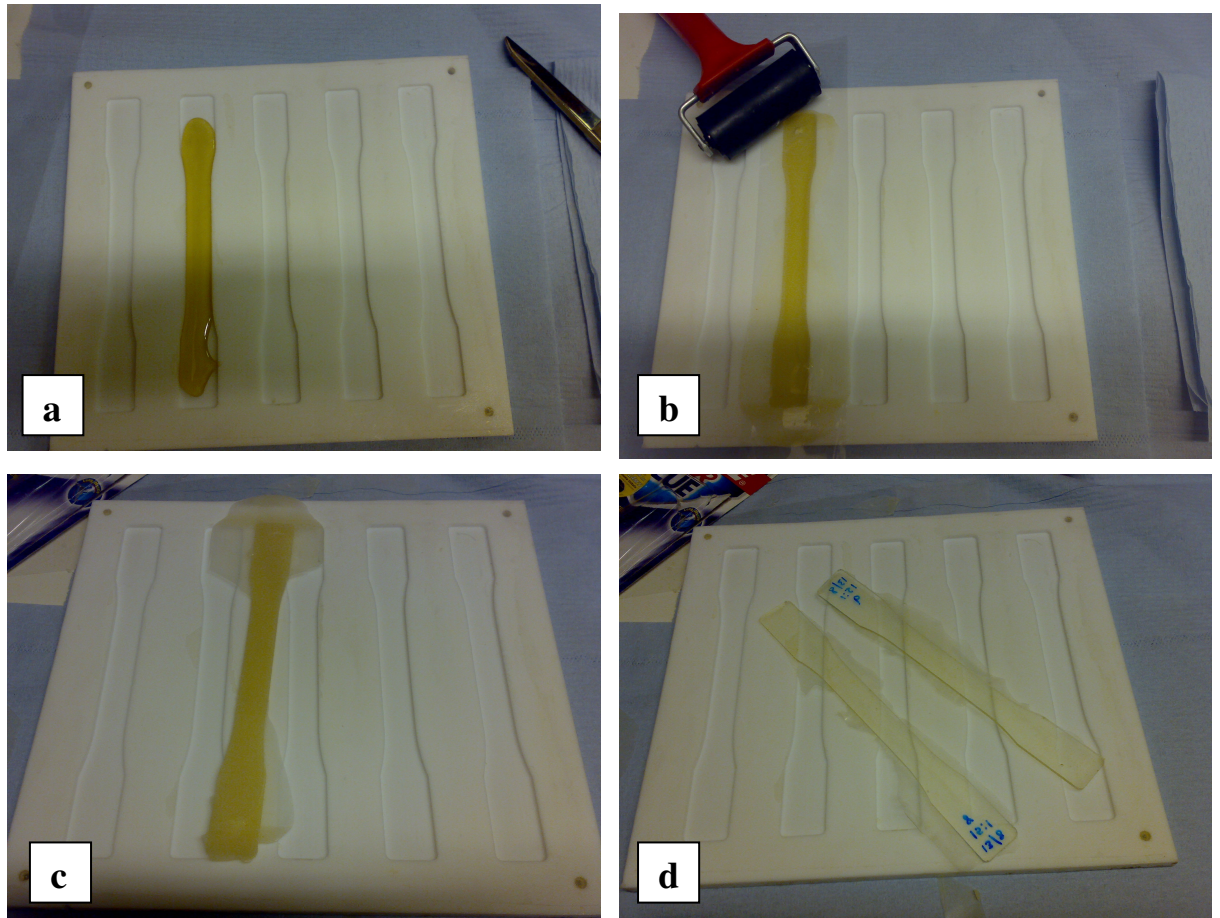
Sample preparation: the pictures show, a - melted Cool-lok poured into mould, b - Cool-lok flattened to fill mould, c - cooled Cool-lok sample, d - cured epoxy samples
